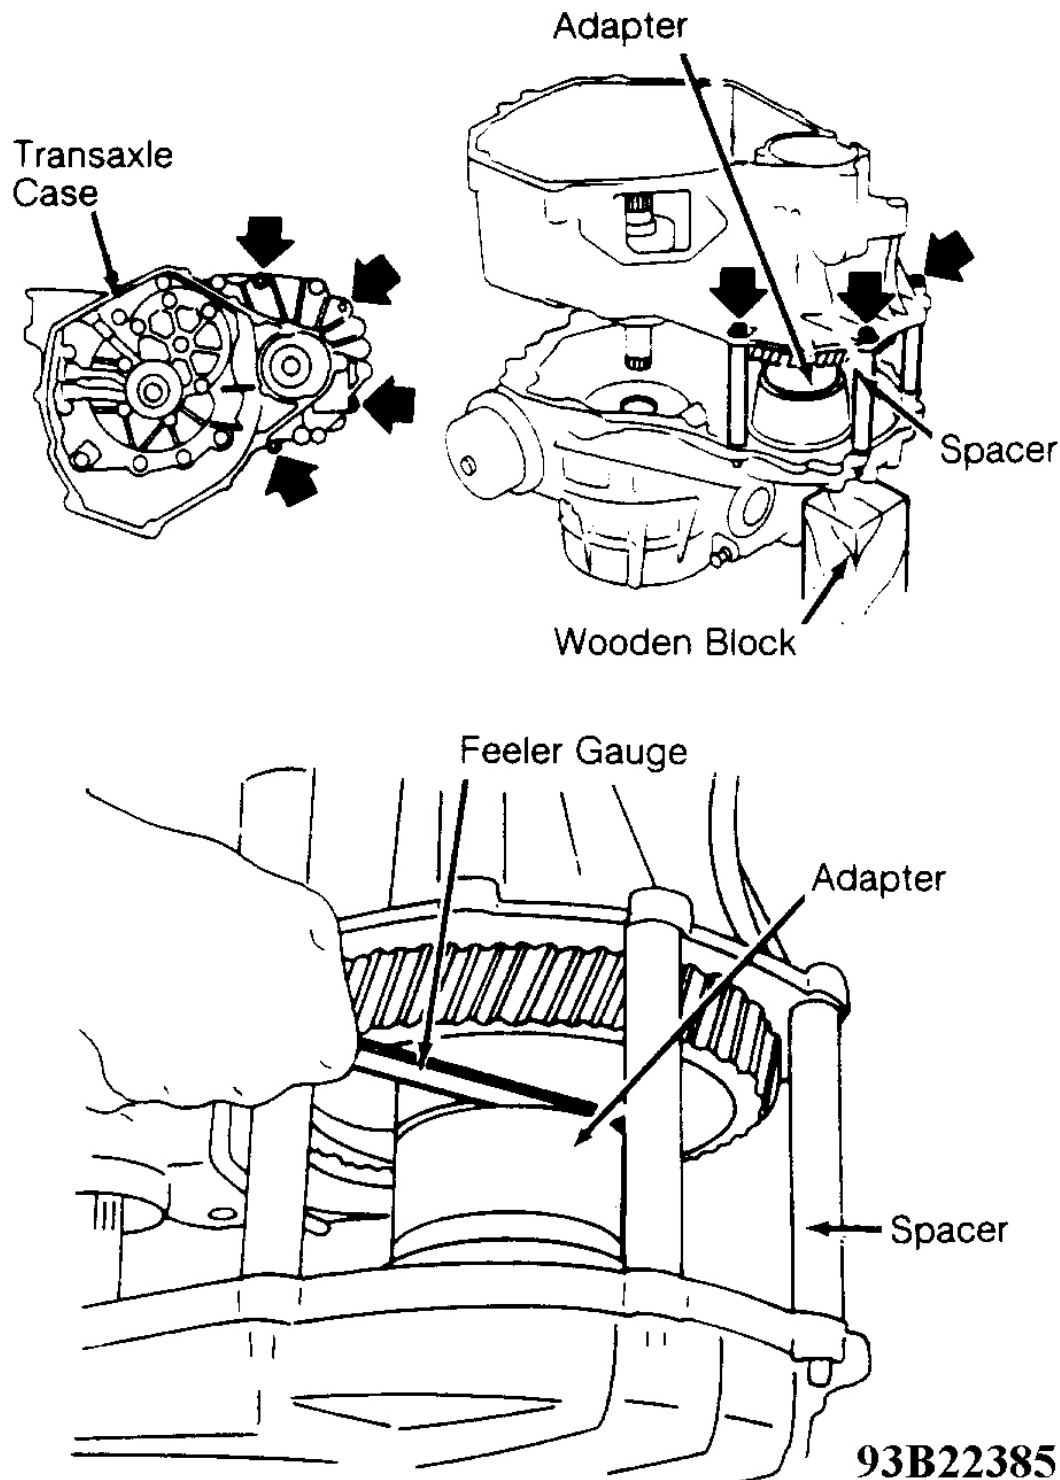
Measuring Final Drive Assembly Bearing Preload
